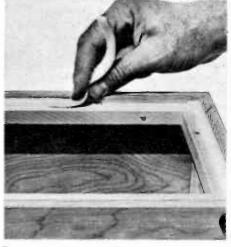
Rear of cabinet. To be sure of getting an airtight seal, glue weather stripping on cleats. Attach panel with eight flat-head wood screws.
